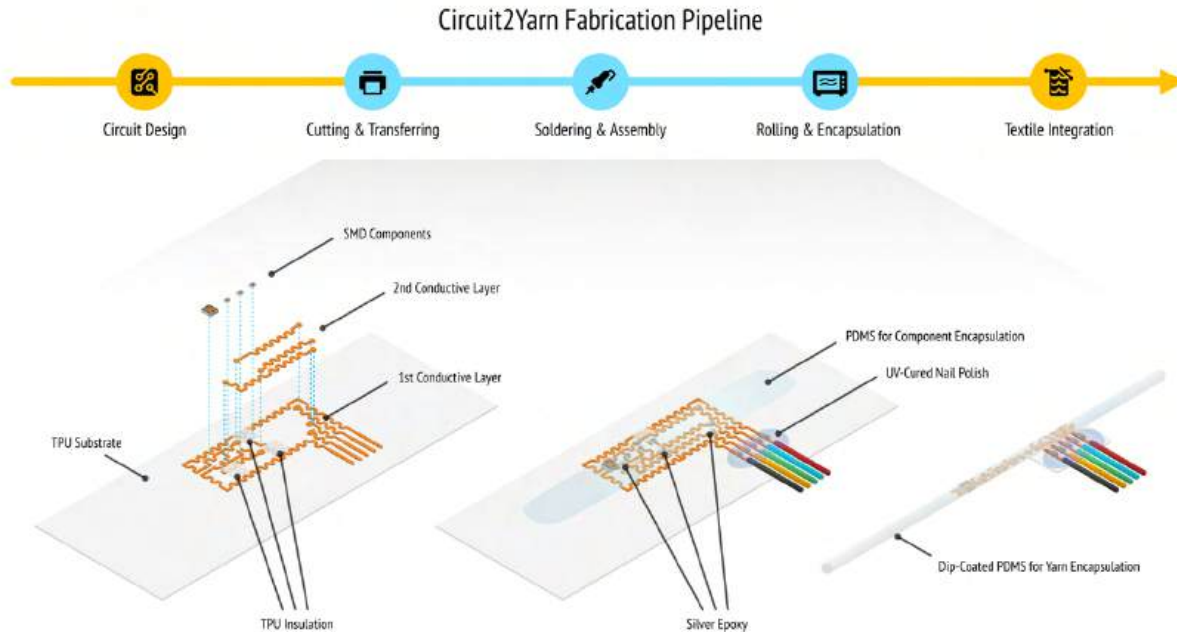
Overview of the Circuit2Yarn fabrication pipeline from flexible PCB design to functional electronic yarn using accessible equipment. Example shown: light sensor yarn.
